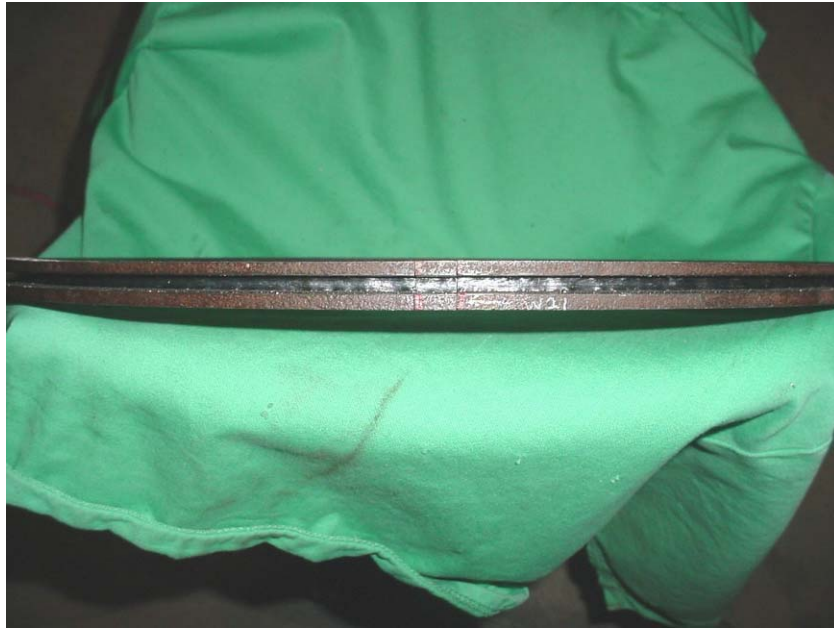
Spin Arc Weld W21 – Outside View of Root Pass Profile
